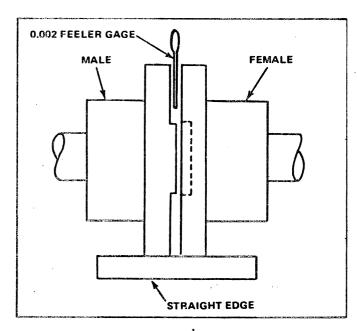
Checking alignment (parallelism) of coupling and propeller flanges.
